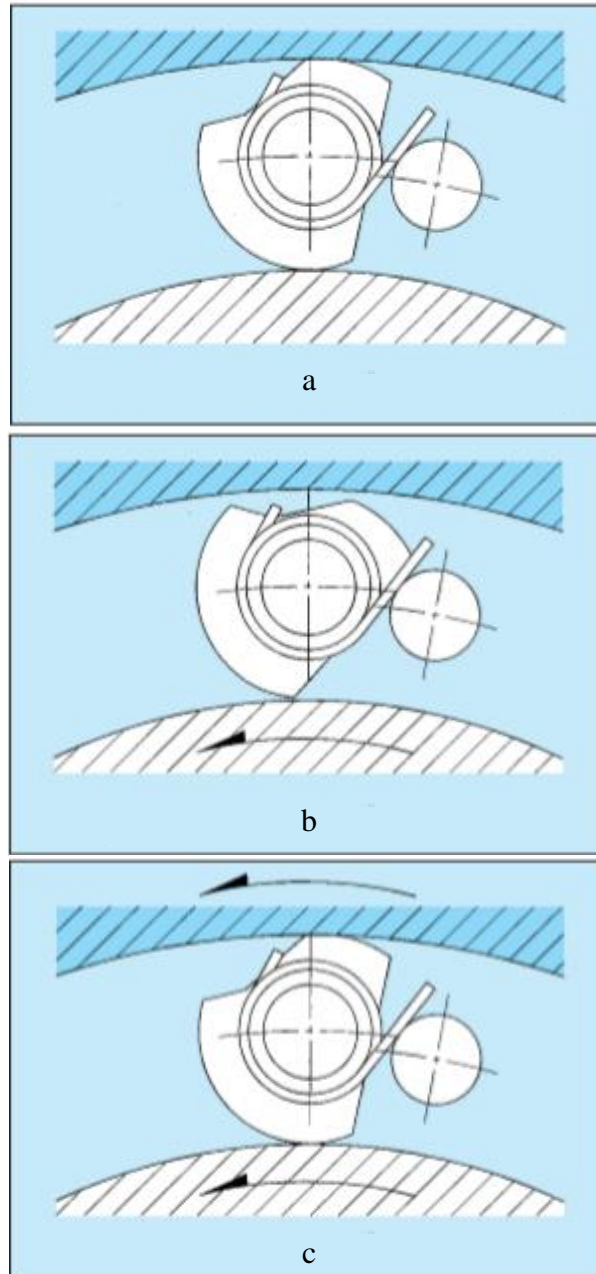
(a) Entire CAM Clutch is stationary (b) Inner race only turning (c) Inner and outer race locked and turning [13].
